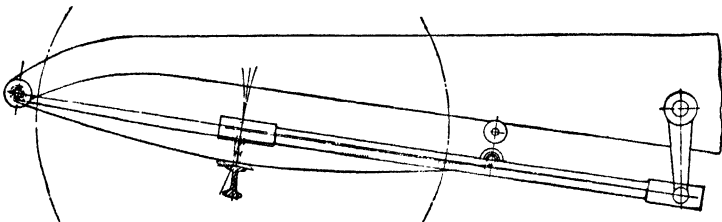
BEST LAY-OUT OF FRONT SPRING AND DRAG LINK WHEN REAR END OF SPRING IS SHACKLED.
